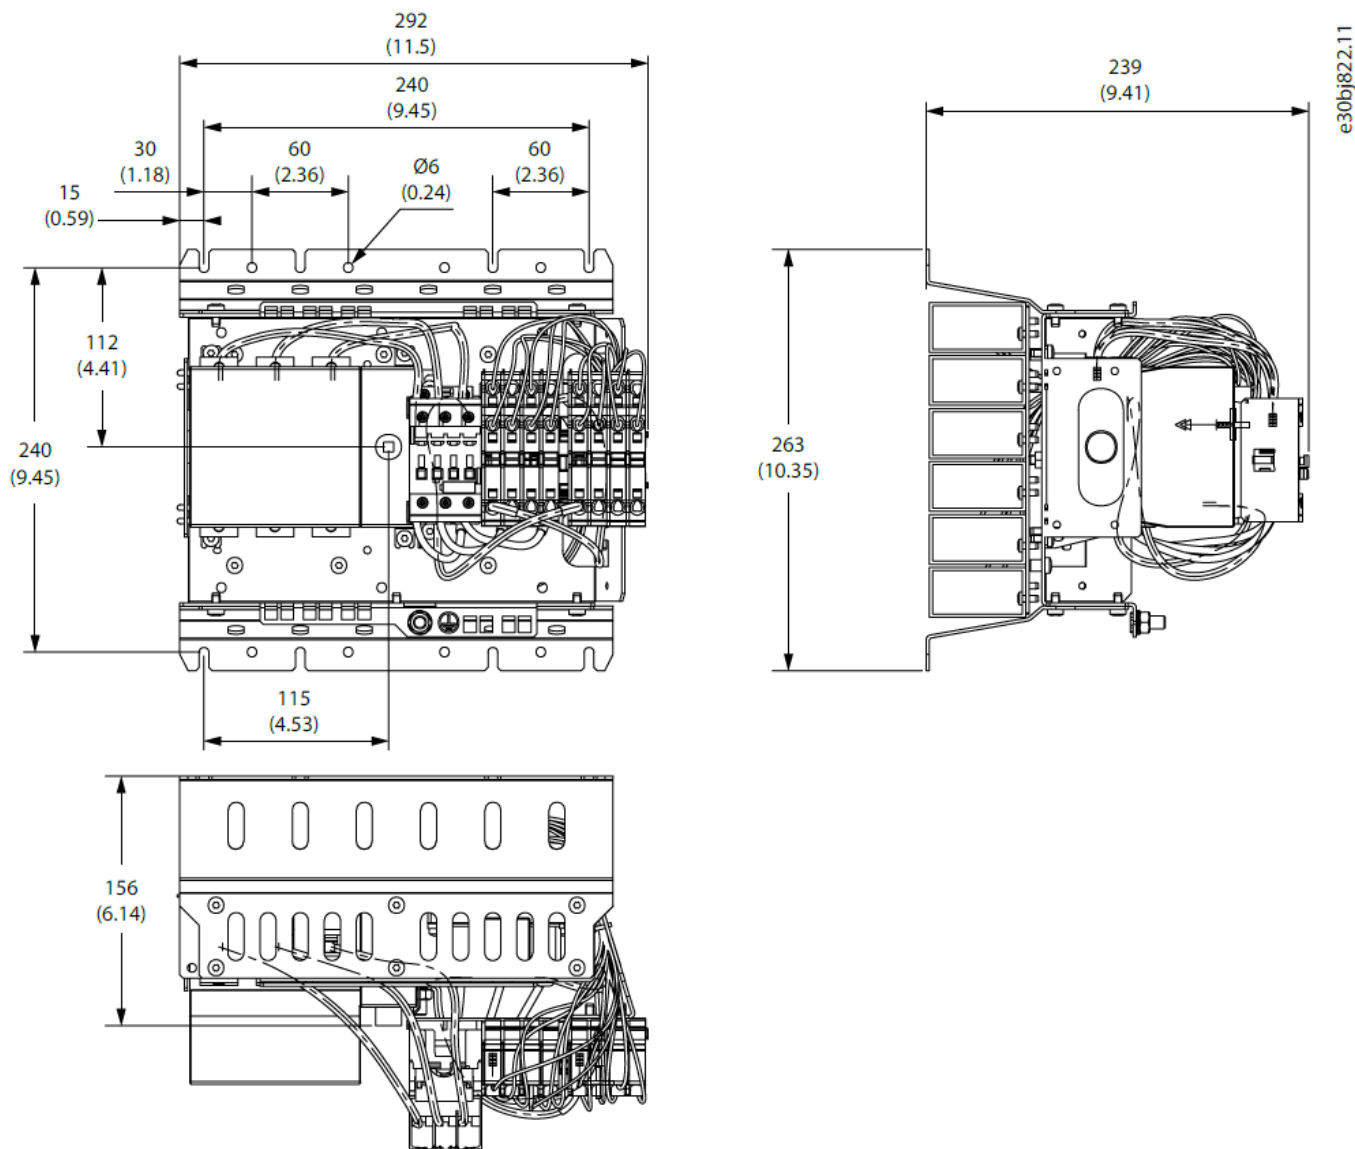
Dimensions of the Pre-charging Unit in mm (in), UL
